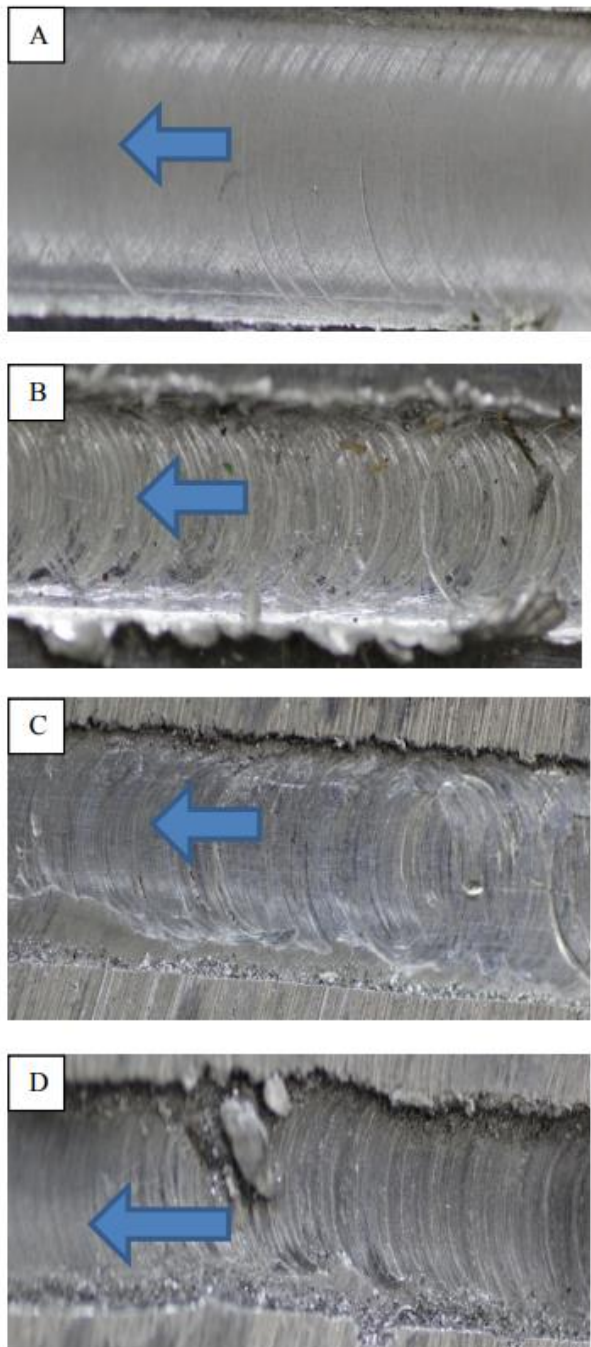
Macroscopic photo of 5052 aluminium surface machined by Krisbow Universal Milling Machine (1) feed rate 24 depth of cut 0.25, (2) feed rate 24 depth of cut 0.75, (3) feed rate 42 depth of cut 0.25, (4) feed rate 42 depth of cut 0.75
